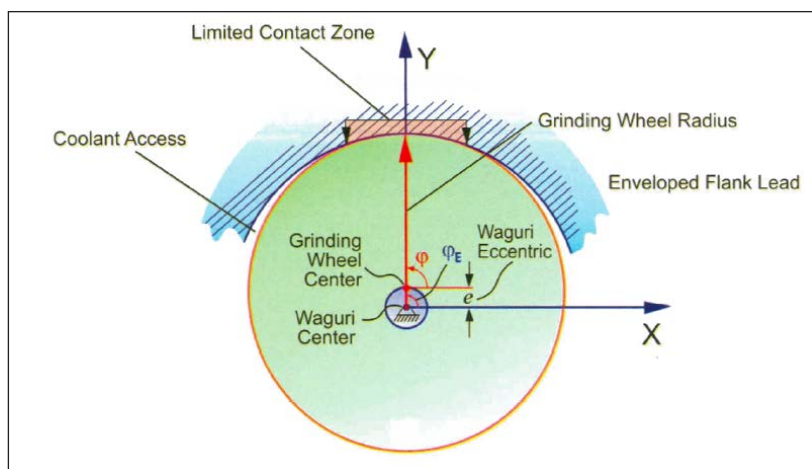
Waguri eccentric principle with coolant access and limited wheel contact.
